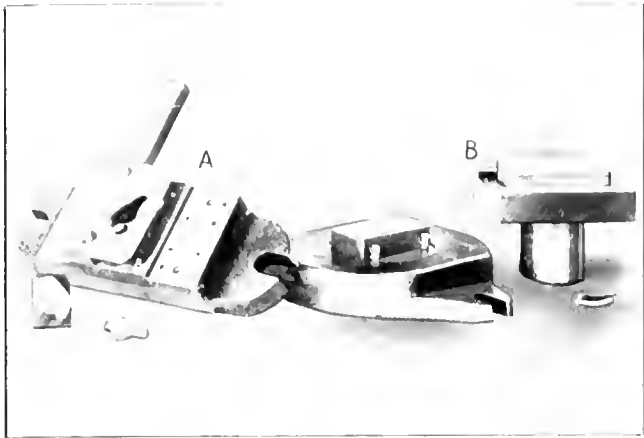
Blanking and Flattening Dies for Moving Cutter Blades
